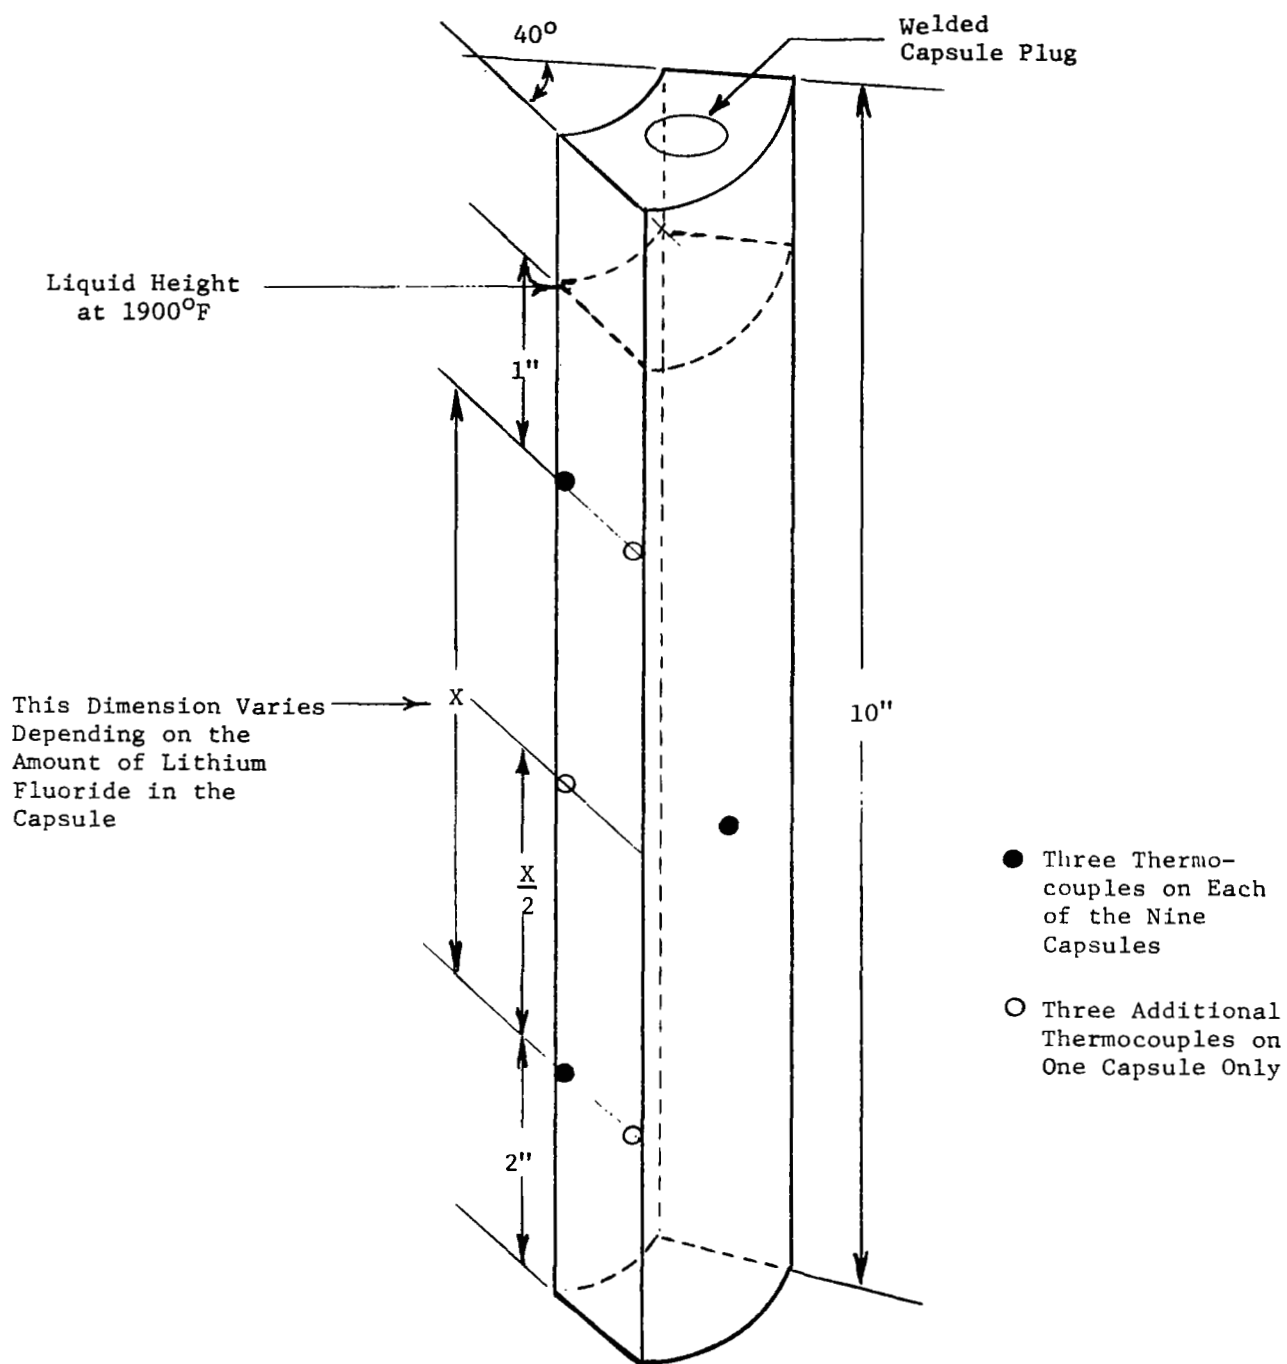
Thermocouple Location - 40° Ring Sector Capsule Test.
